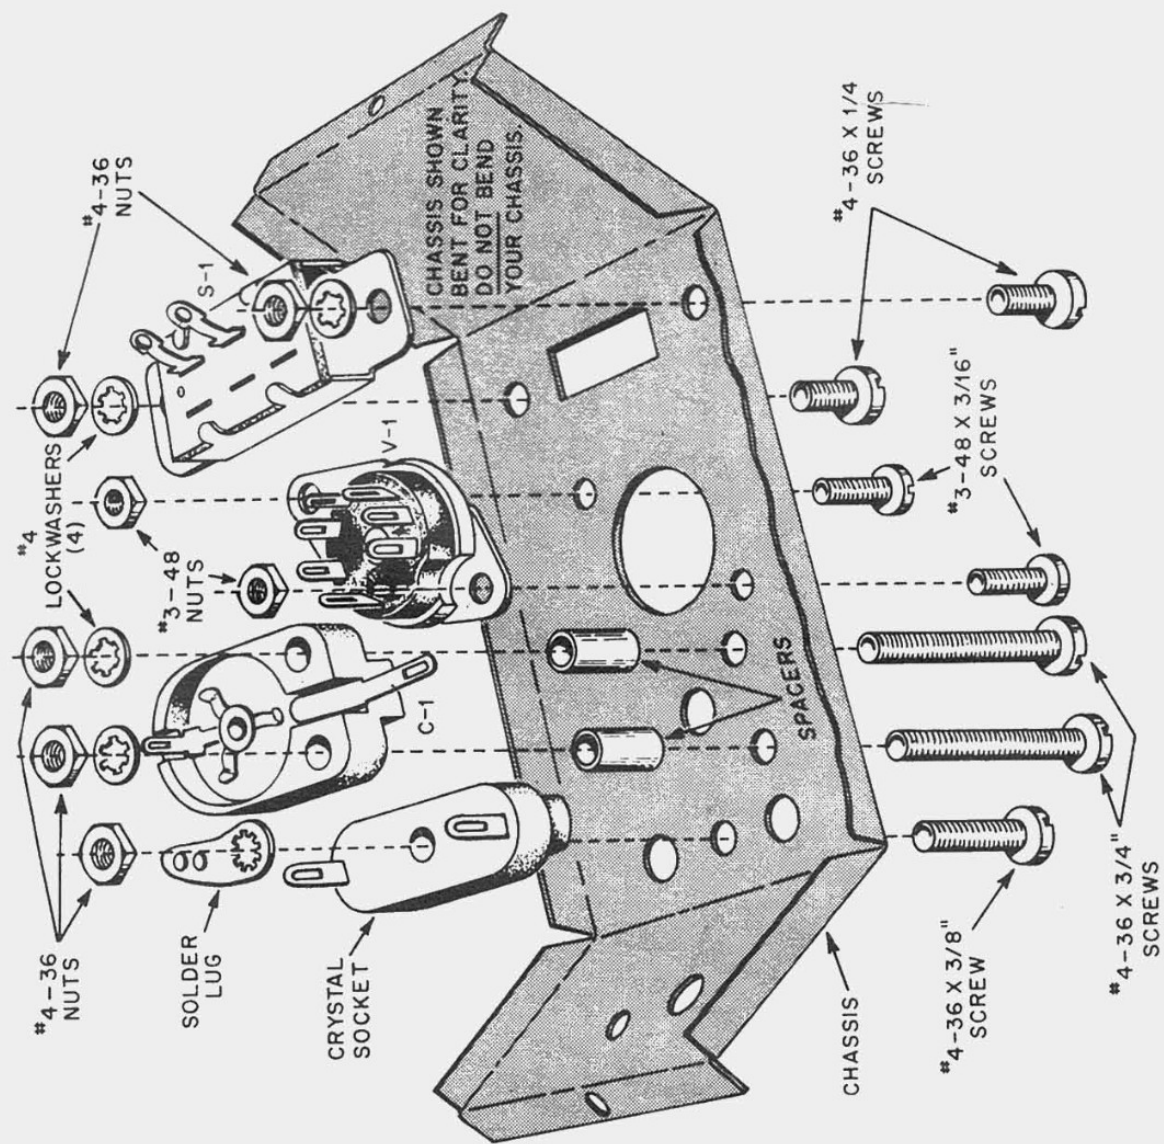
MOUNTING PARTS IN THE CHASSIS
